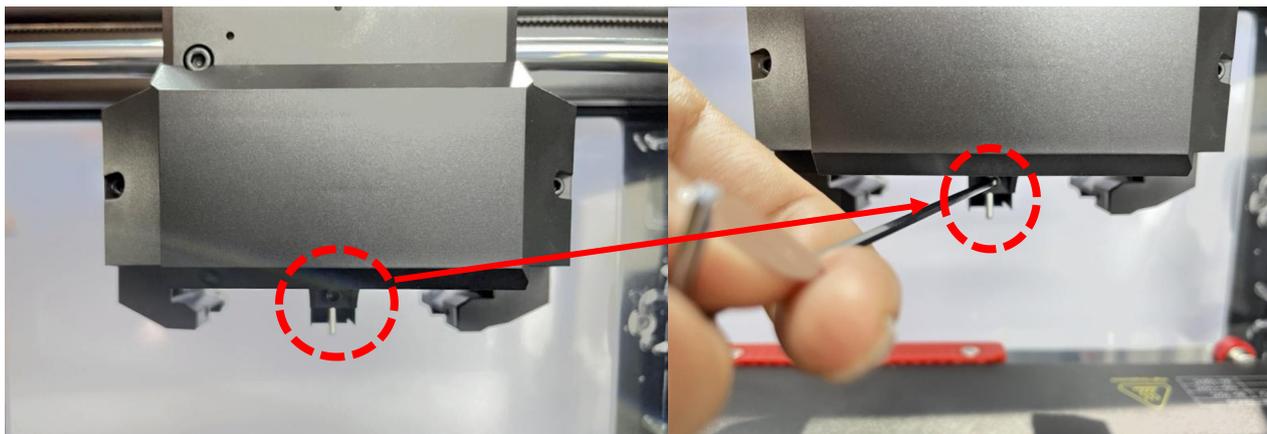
Remove the 1 screw on the back of the auto-leveling assembly.
